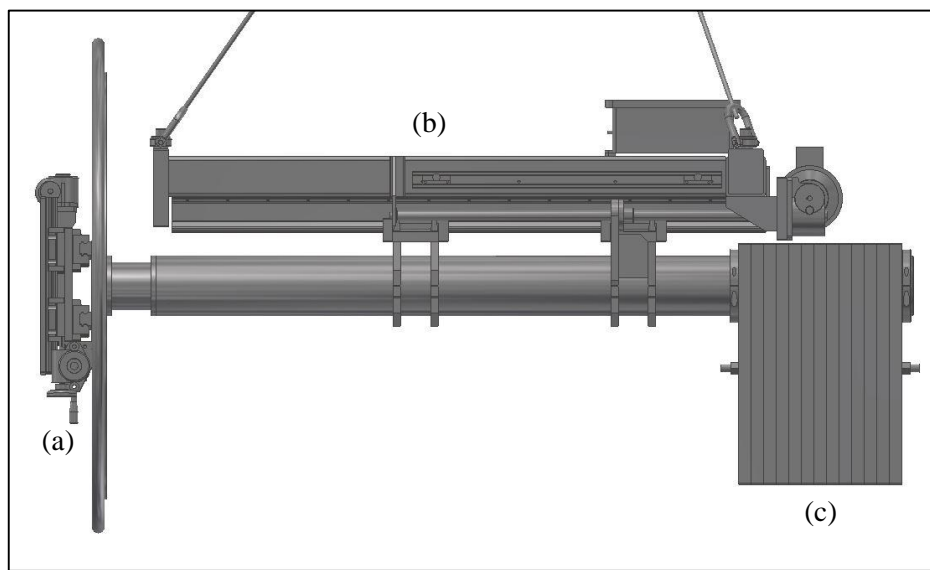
Wisconsin Tooling Setup showing (a) the rotating head, (b) the main beam and (c) the counter weight assembly (University of Wisconsin, 2001).
